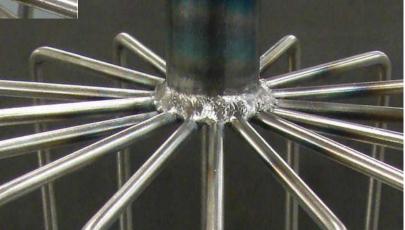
Tacks on bottom ring used to hold the side spokes in place.
